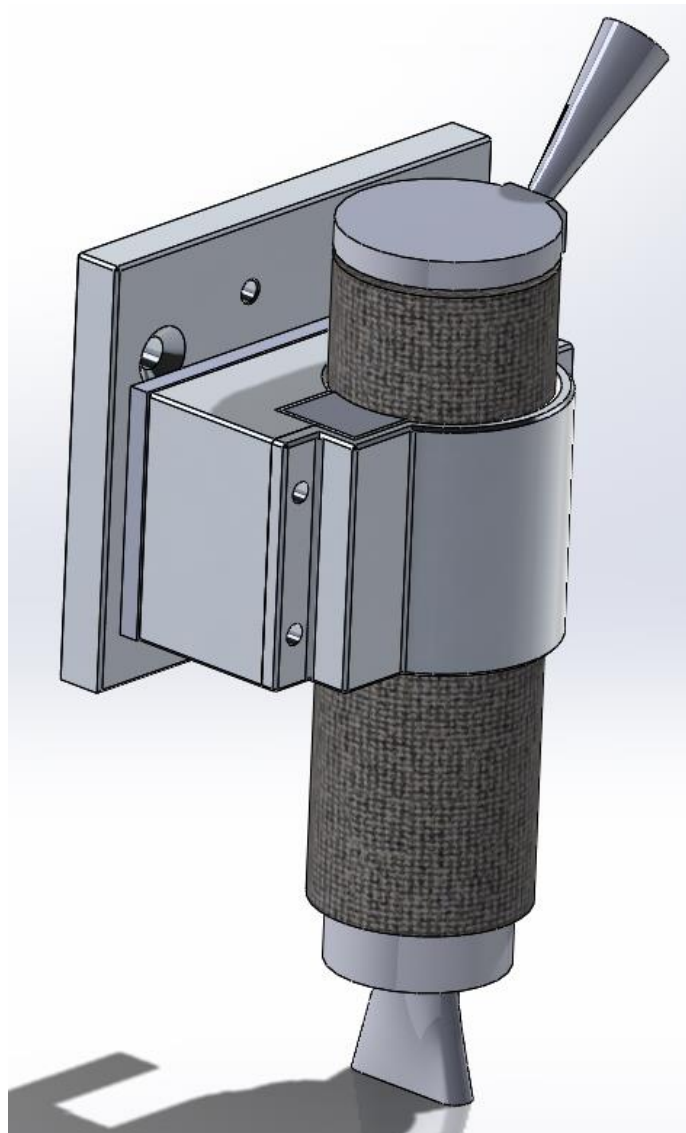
Glue gun mounting assembly with added thermal features and representation of HB500EHT glue gun.
